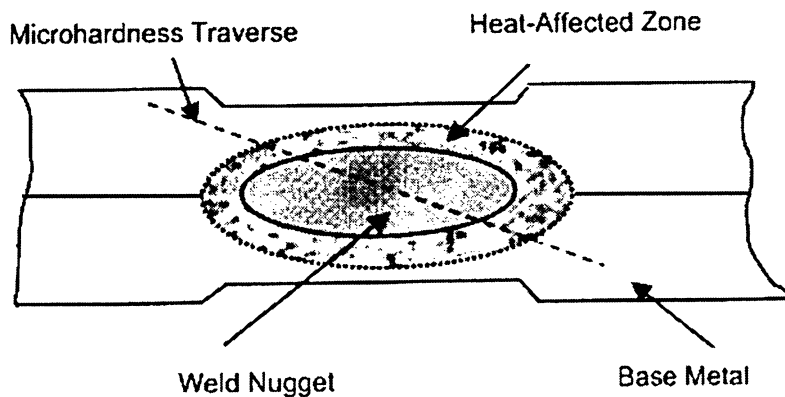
Microhardness test on the cross section of weld. ^[50]
